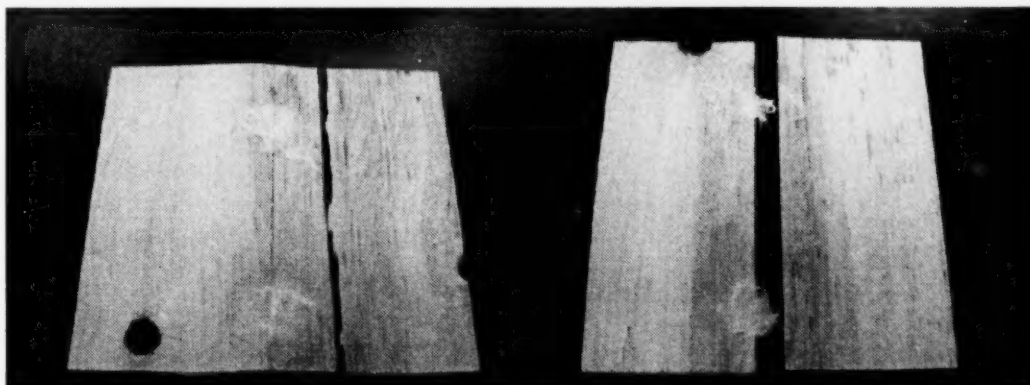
Failure types of composed veneers by fibre-gluing in tensile test (L: wood failure; R: glue-line failure).
